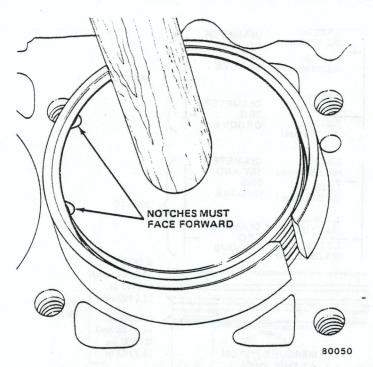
B-137 Installing Piston Assembly Into Cylinder Bore
